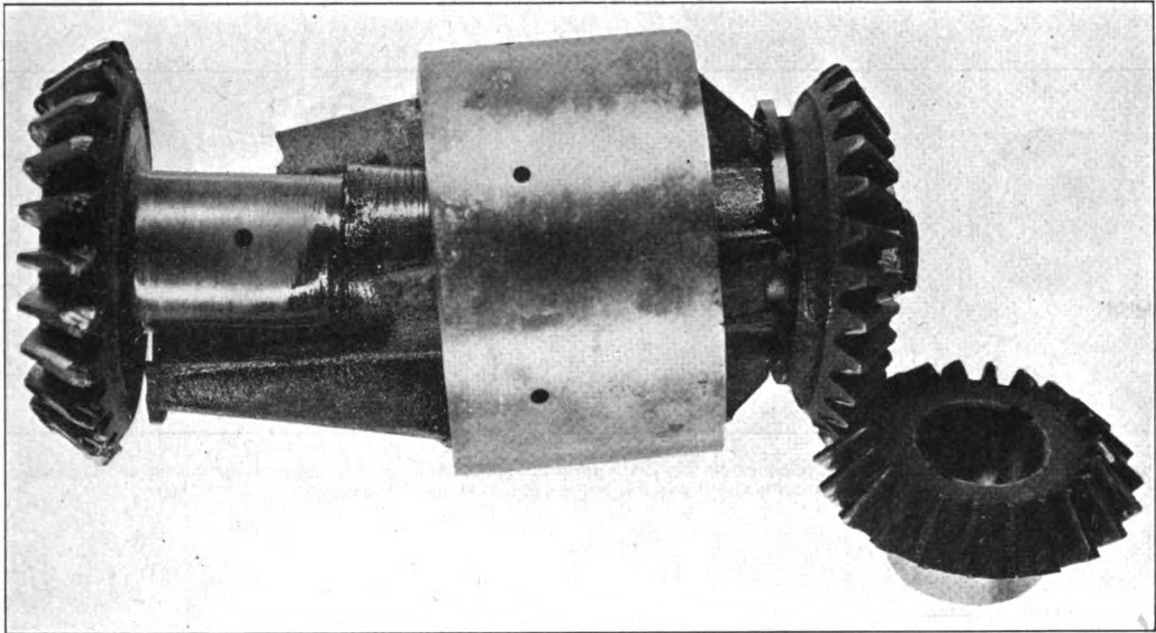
Burnt bearings oil and water pump gear assembly. This failure occurred during the preliminary runs on the dynamometer.
